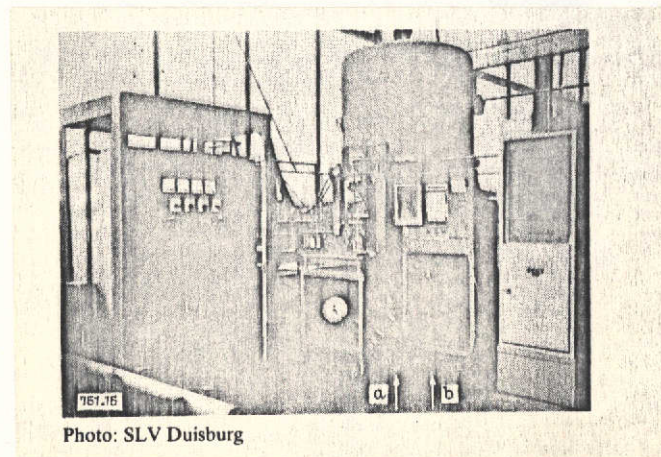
Diffusion welding system. System with conductive (a) and inductive (b) heating of the work pieces.
